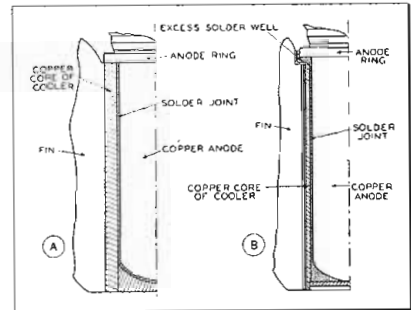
(a) Initial copper core-anode-fin structure and (b) modified structure with solder well
